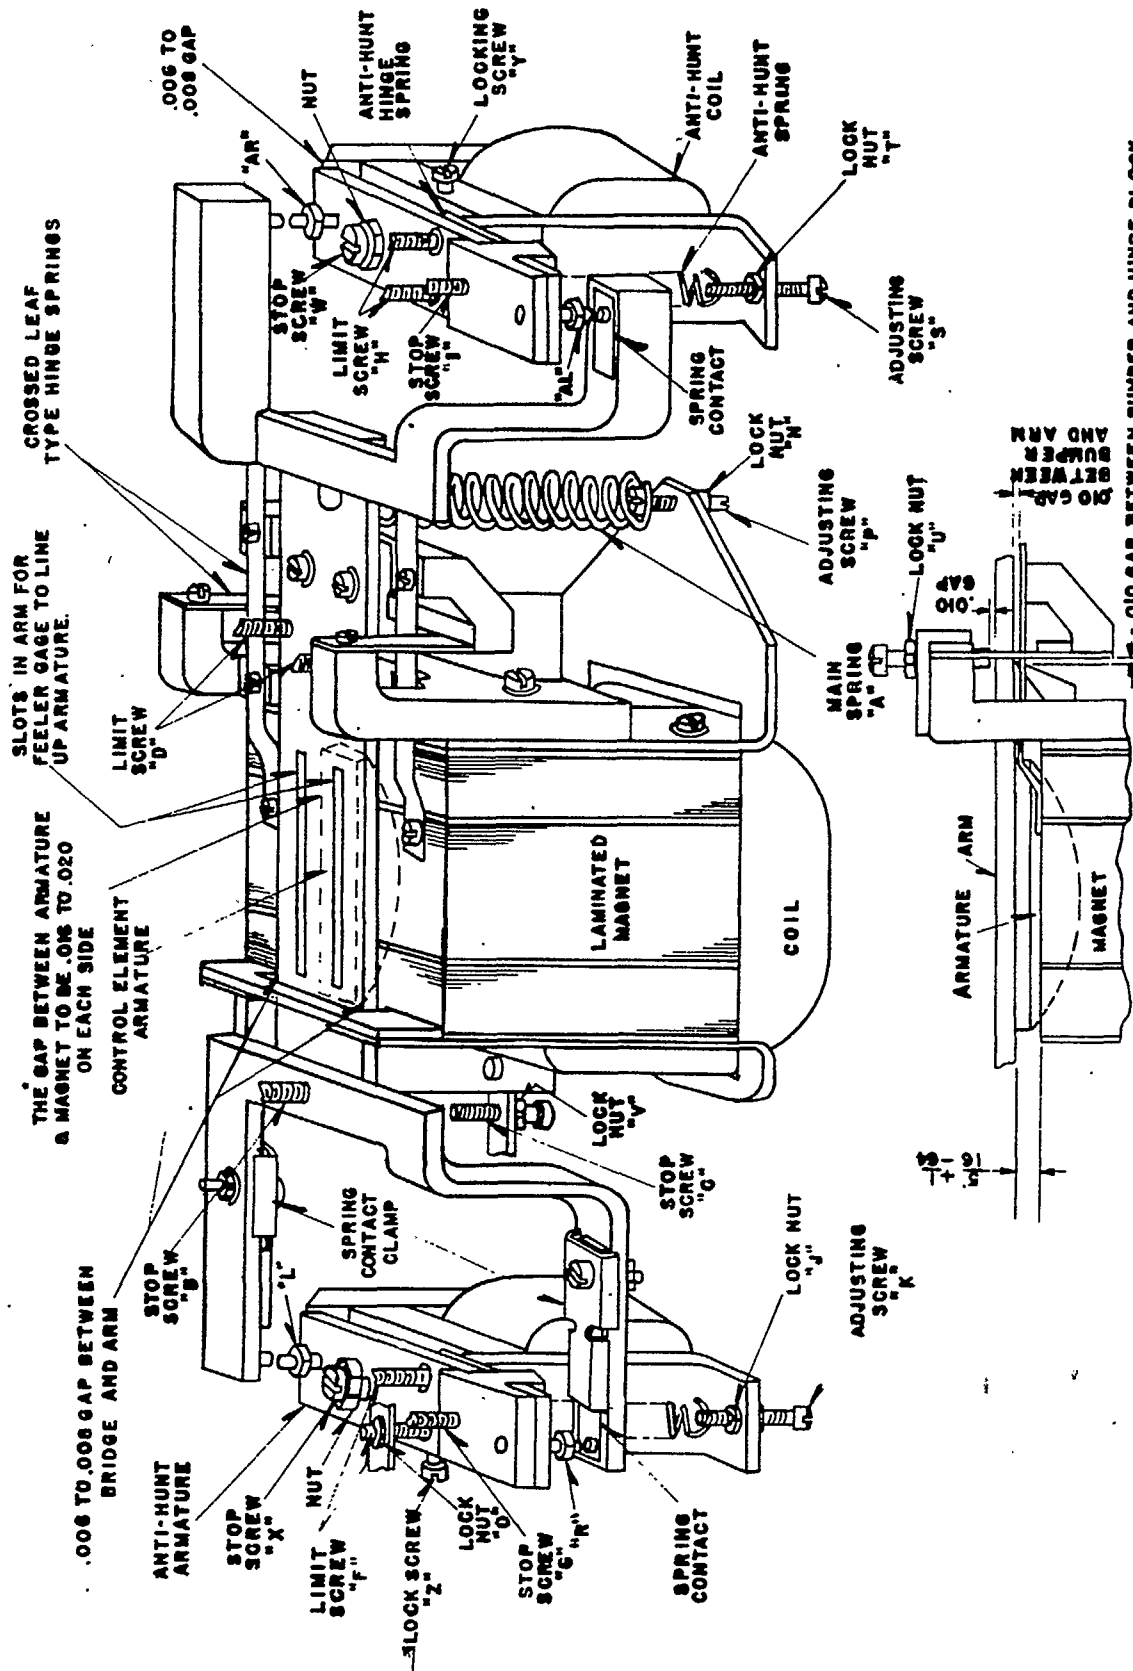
Westinghouse Type "BN-2" Voltage Regulator -- Pictorial View of Control Element Showing Adjustment Details
